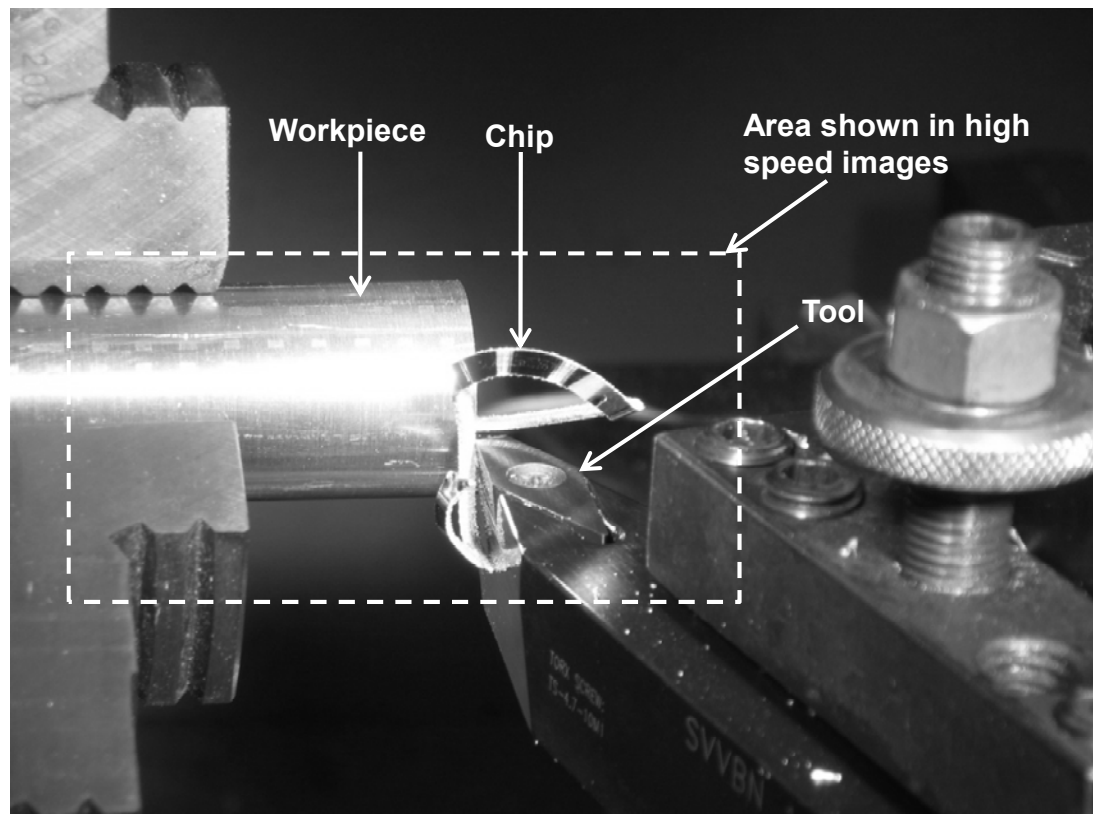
The configuration of the tool and workpiece during orthogonal cutting process.
